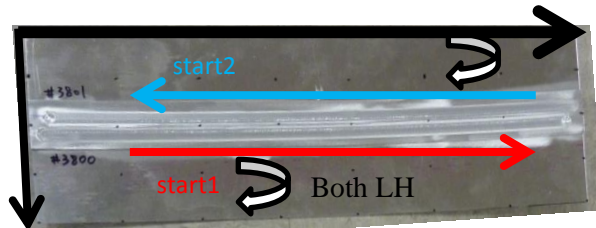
Picture of opposite welding direction with LH thread pin tool
